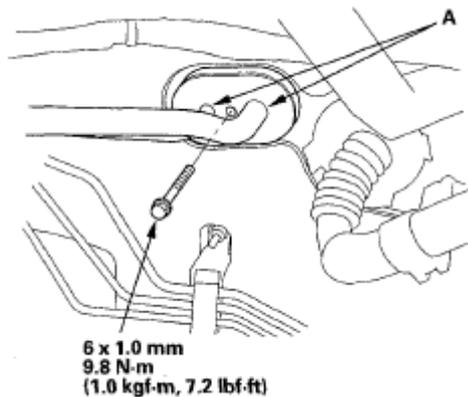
Identifying A/C Lines Connection At Evaporator Core With Torque Specifications
